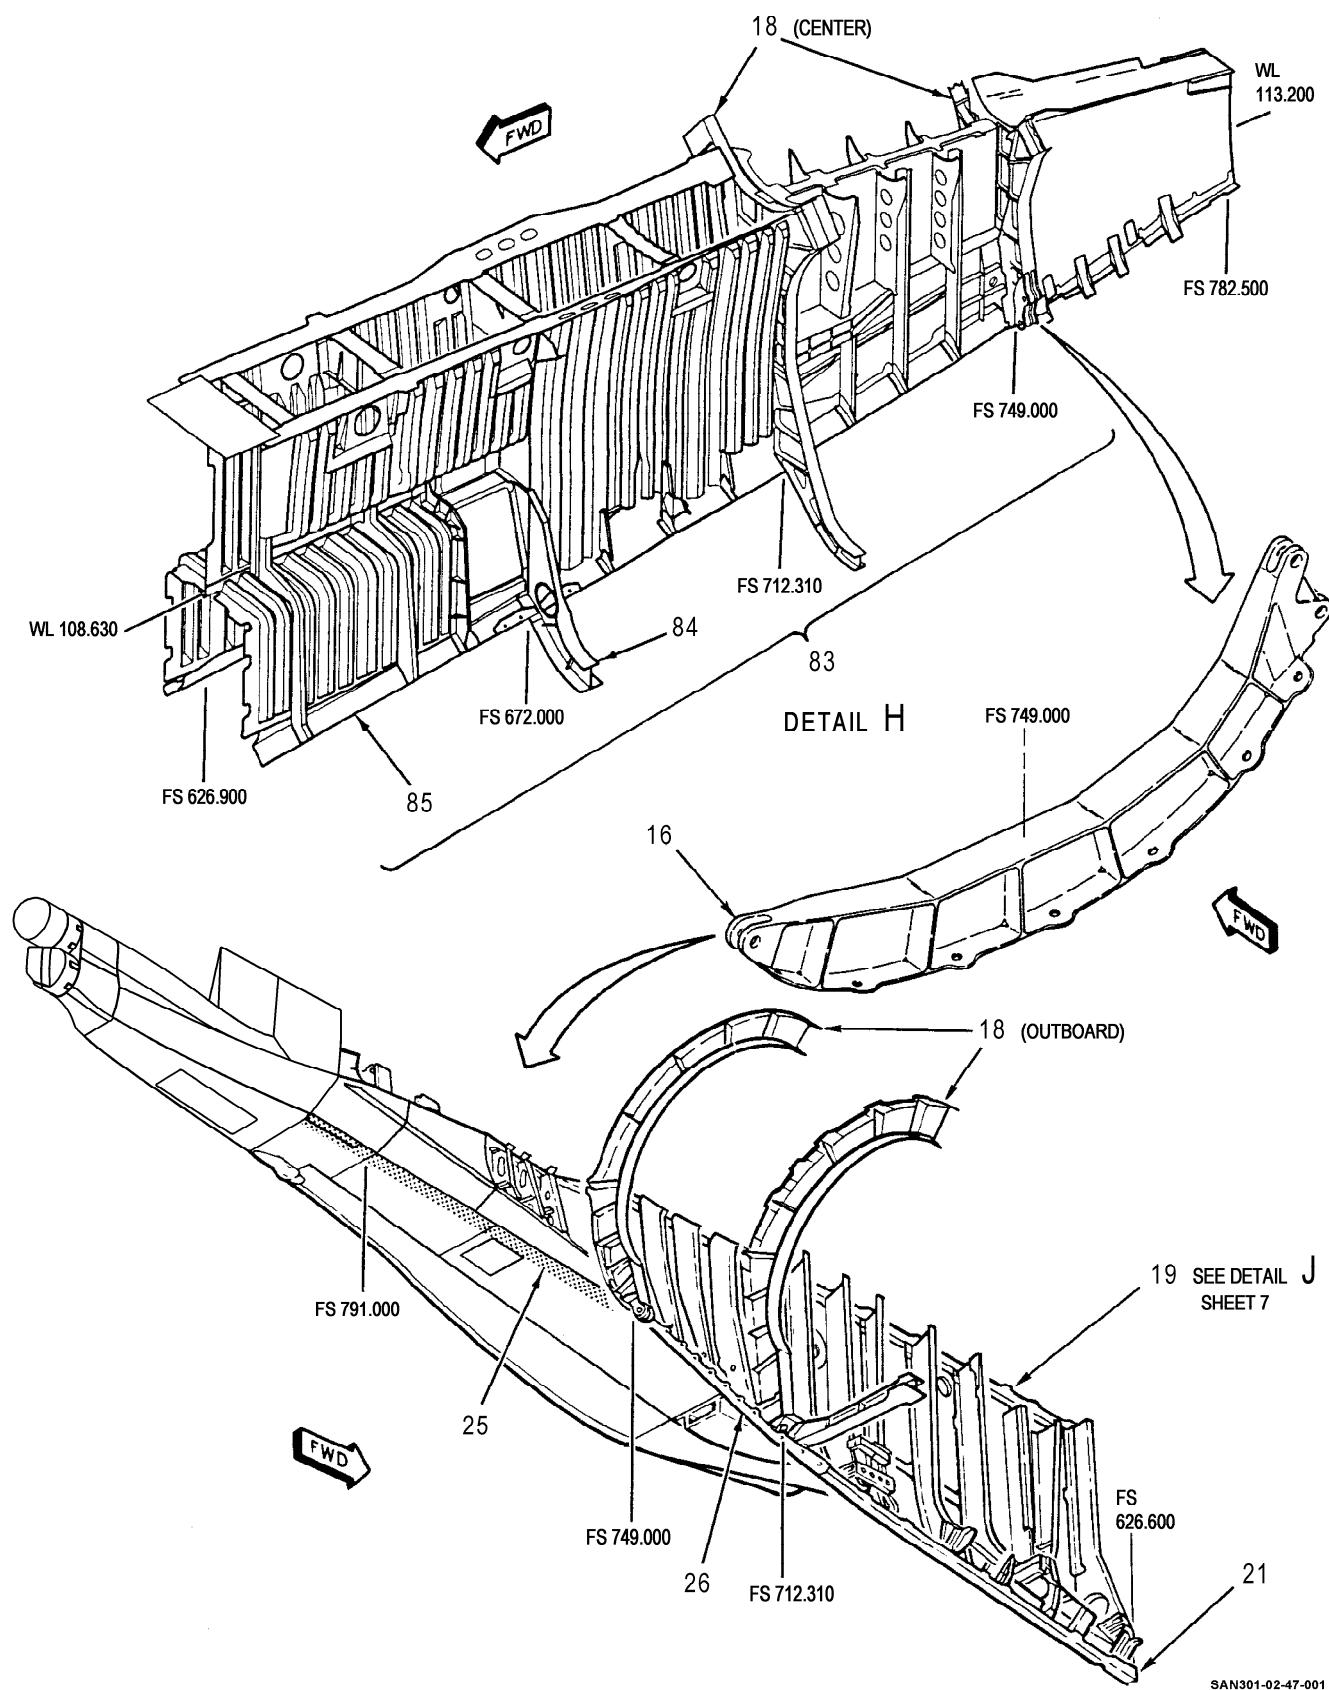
Positive Overload Warning Aircraft Inspections (Sheet 6)
